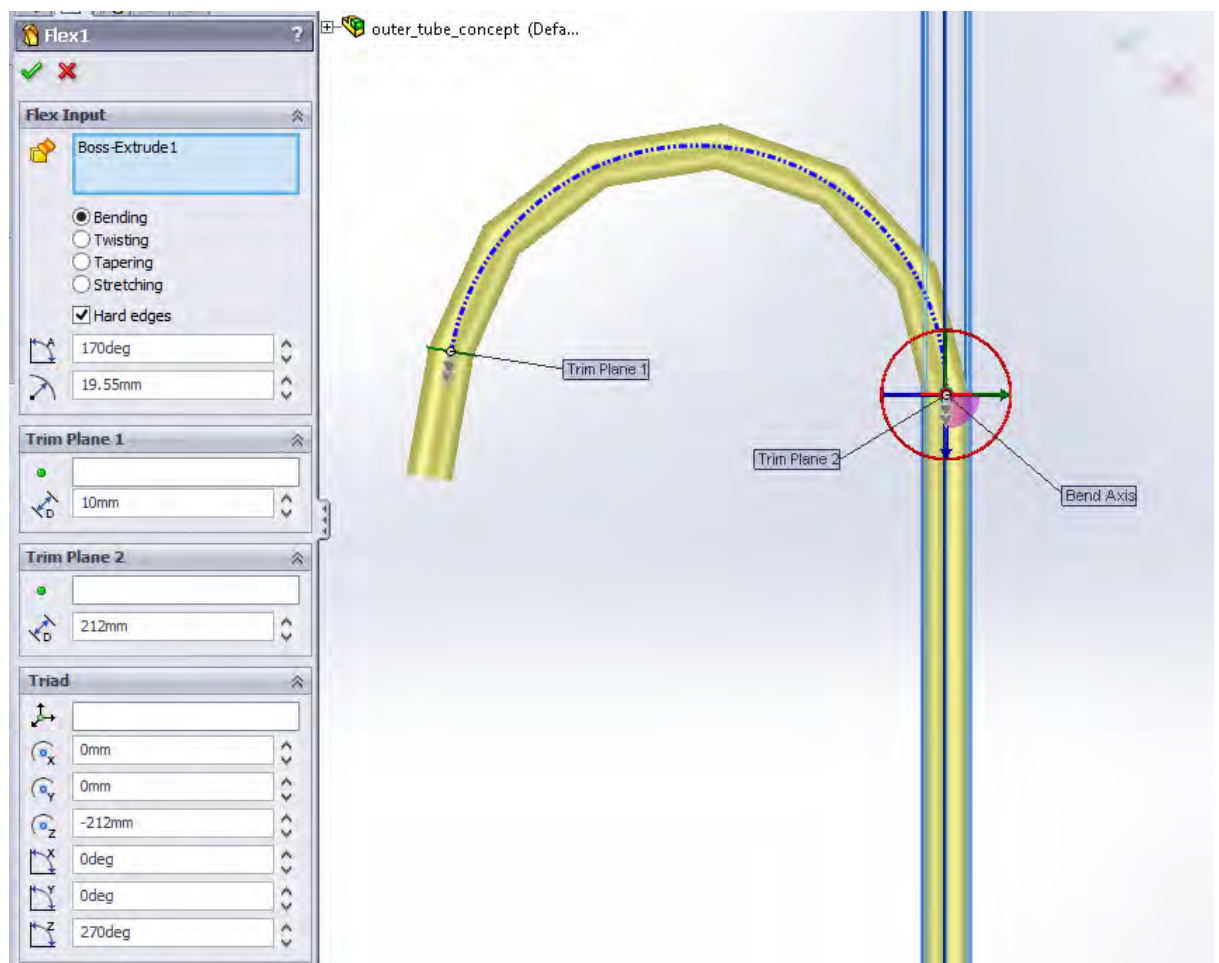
Test 1 with the bending angle set and the bending radius being the parameter sought after
